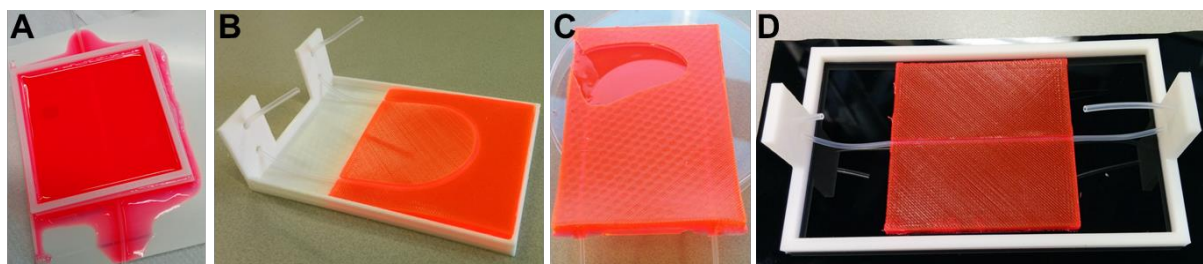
Several holder designs. A) A squared holder on top of a cured PDMS plate, B) A completely PLA 3D-printed holder, C) A destroyed PDMS plate due to trapped gas bubbles and newly casted PDMS lifting the plate, D) 3D-printed holder on top of a smooth HIPS plate
